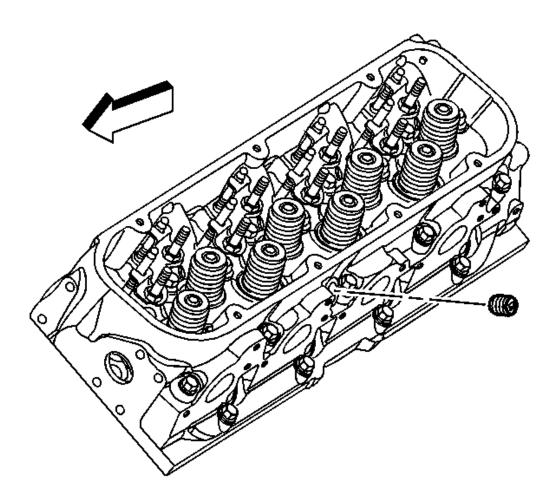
View Of Cylinder Head Coolant Hole Plug Courtesy of GENERAL MOTORS CORP.
